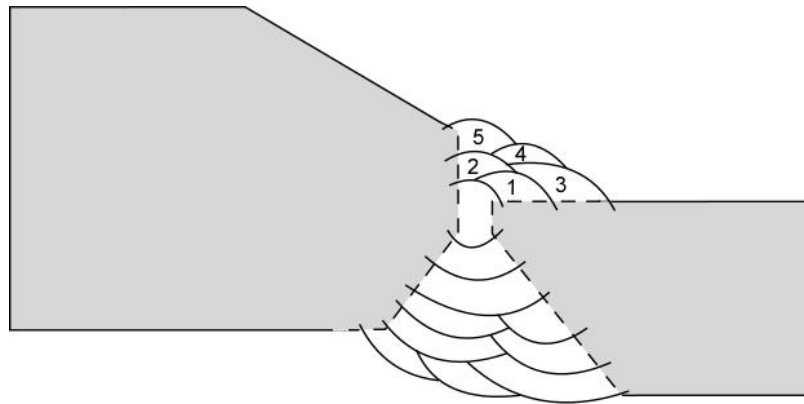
Multi-pass backweld with beads stacked away from thinner side
